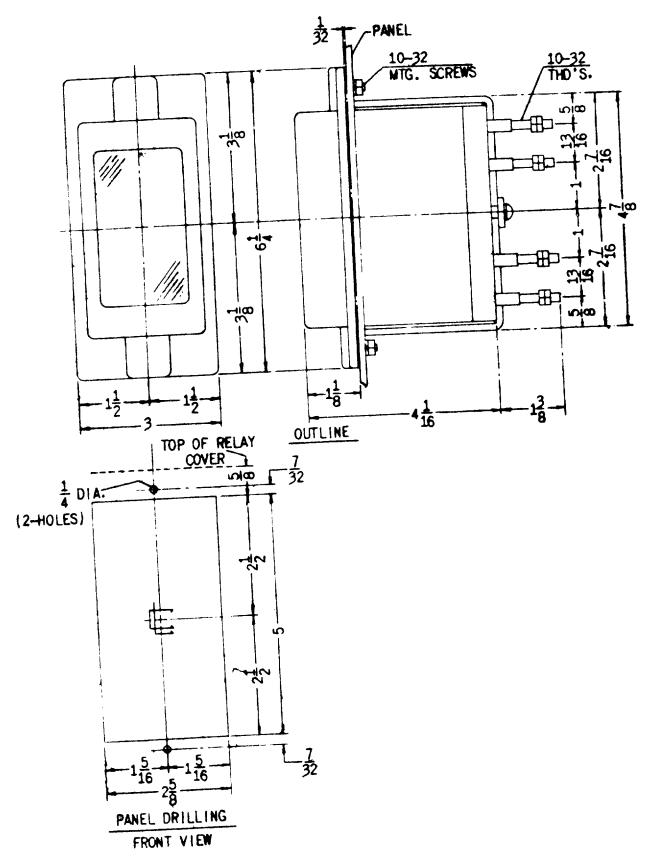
(0148A3978-3) Outline And Panel Drilling Dimensions For The Semi-Flush Mounted NGA15D Relay
